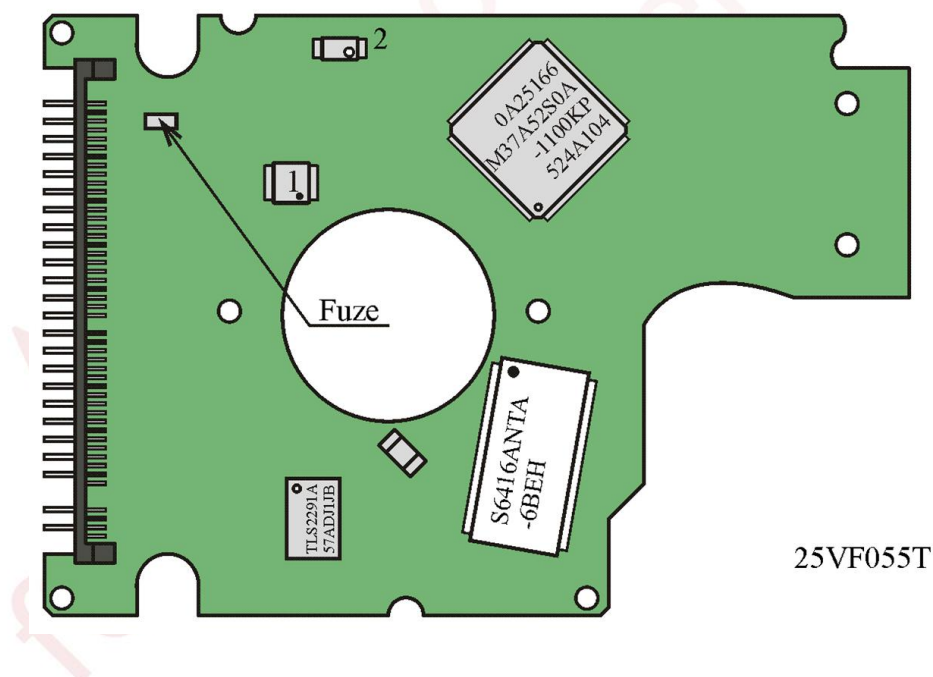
External view of the controller board in 7K100, HTS721(HTS721G9) drive family.
